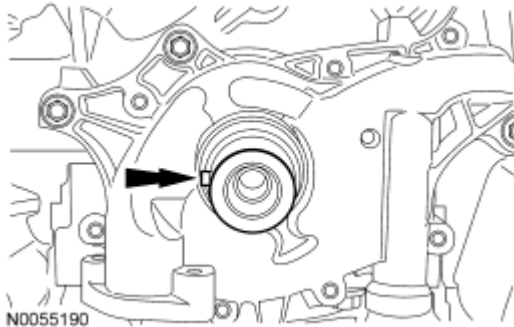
Positioning Crankshaft Dowel Pin In 9 O'clock Position
